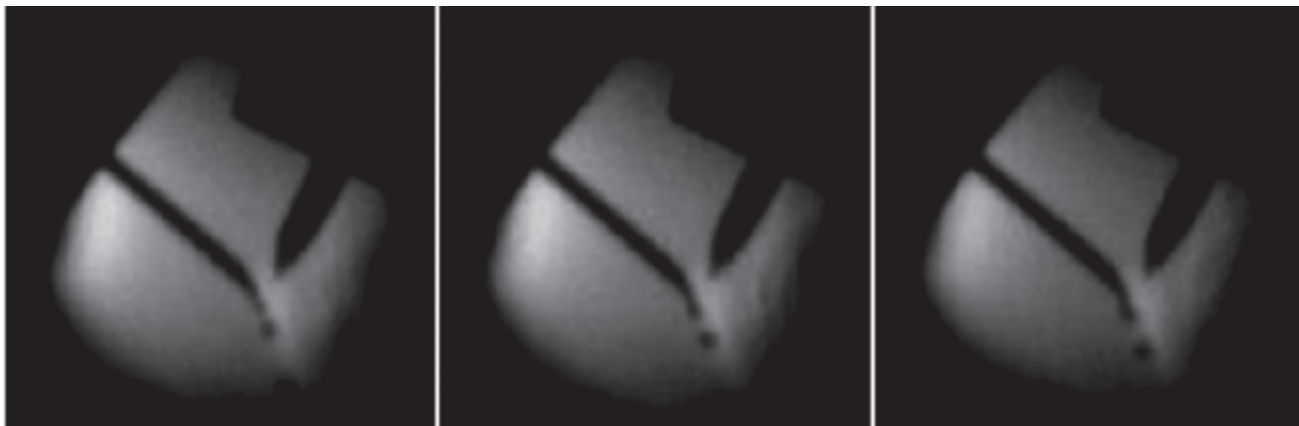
Xenon backlighting of a GMAW of CuSi3 in free-flight assisted with a GTAW arc in pure argon shielding gas (Ref. 15).
